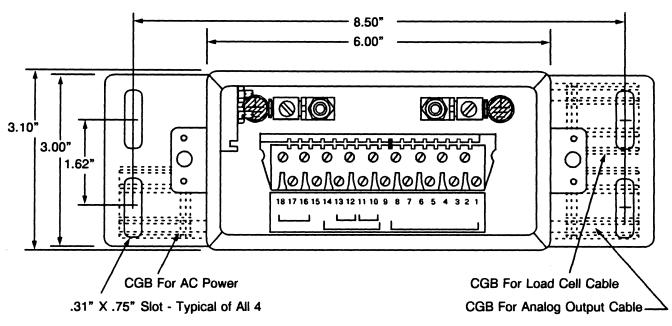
b: Stainless Steel Enclosure Mounting Details (Inside view with cover removed)
